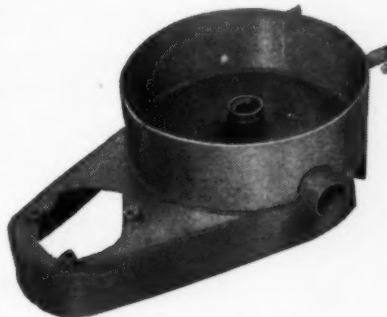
Present Welded Steel Design—Stronger, more rigid. Weighs only 43 pounds. Material Cost \$2.50; Fabrication—\$9.77. Total Cost—\$12.27.
